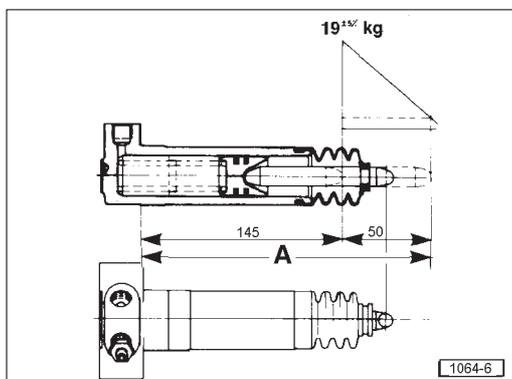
Clutch assembly hydraulic operating cylinder.
